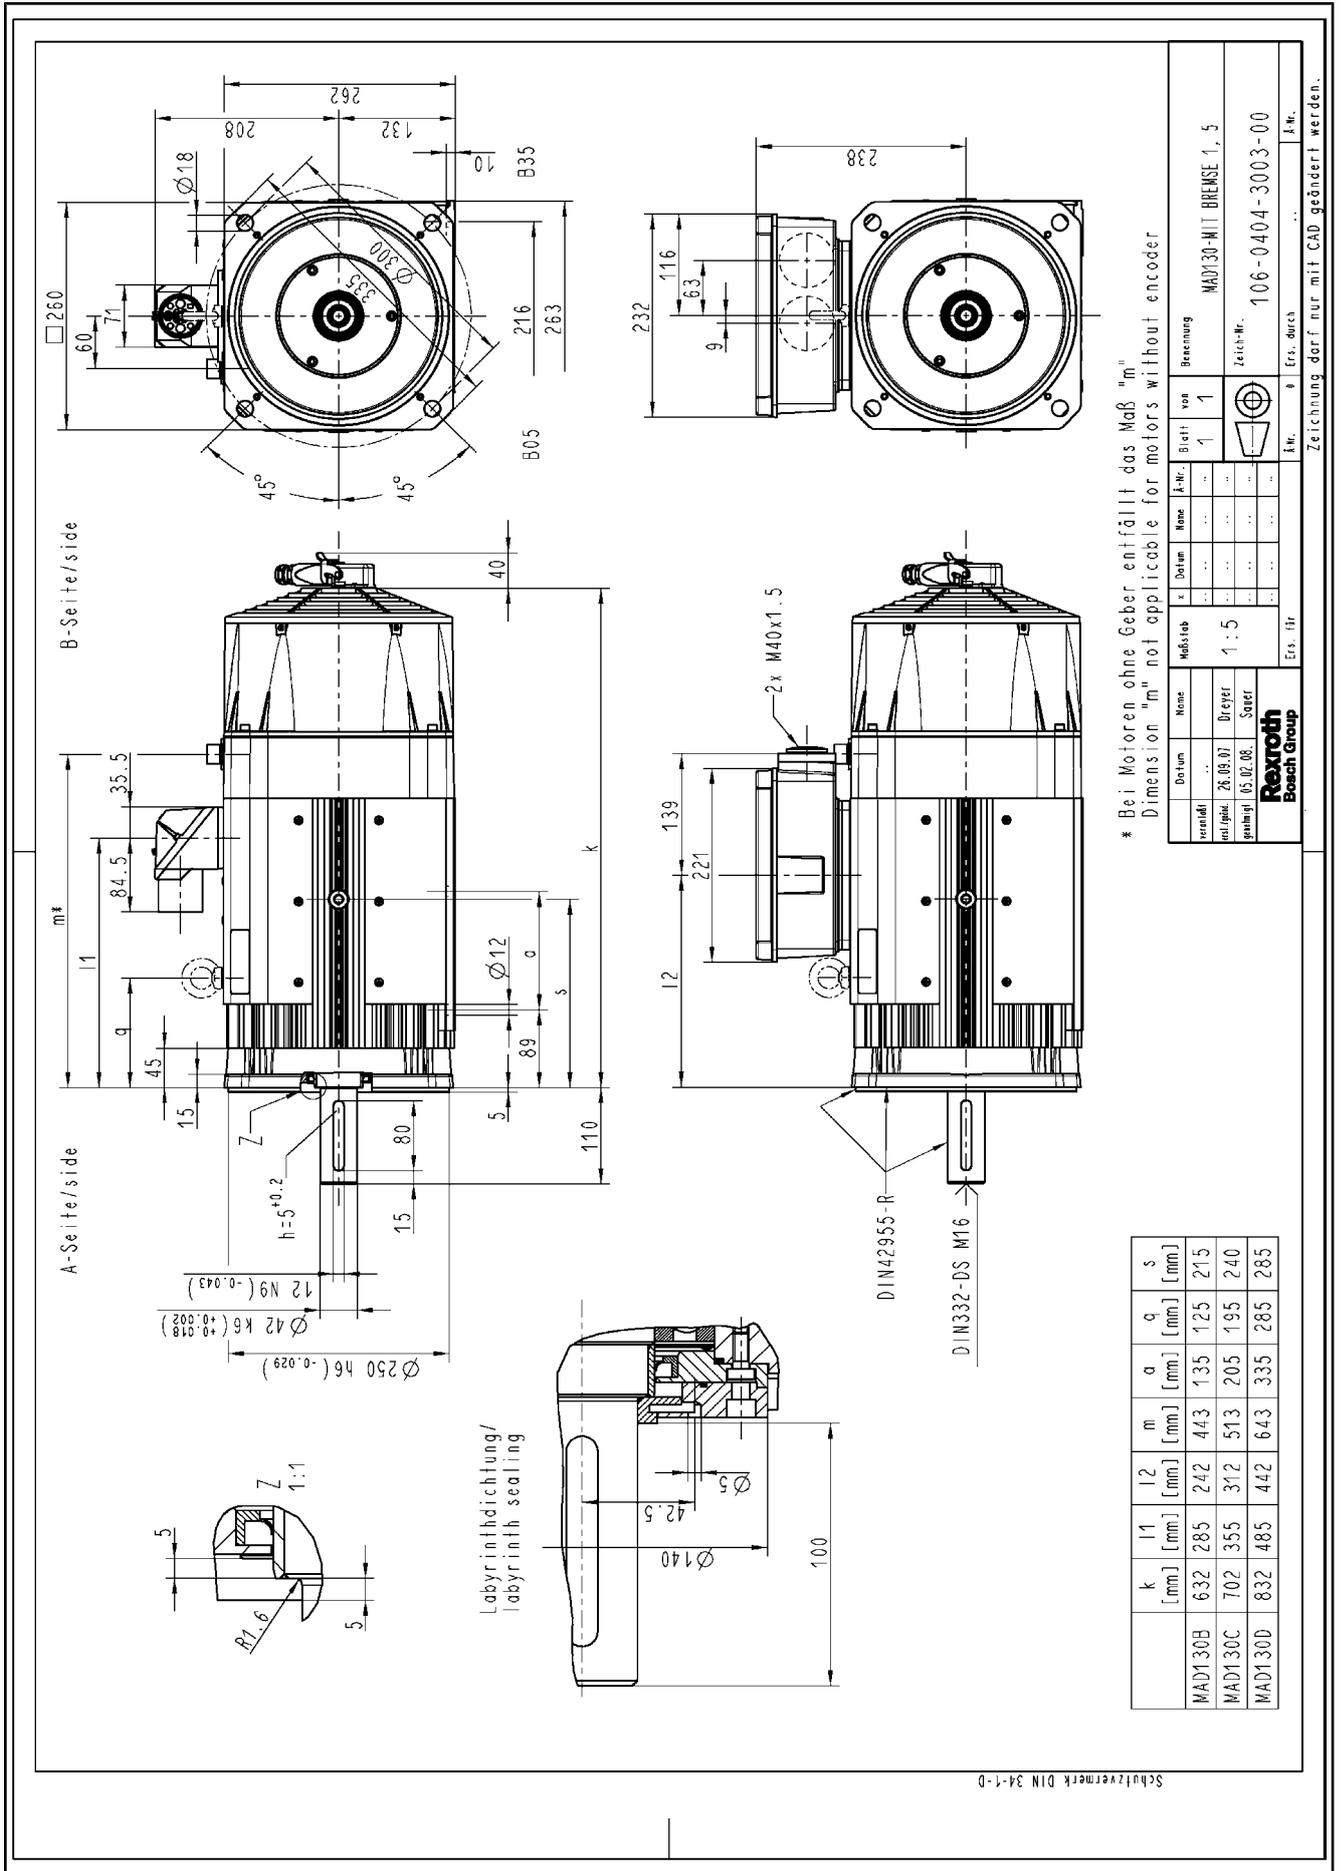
MAD130 with brake 1/5 (terminal box rotatable)
